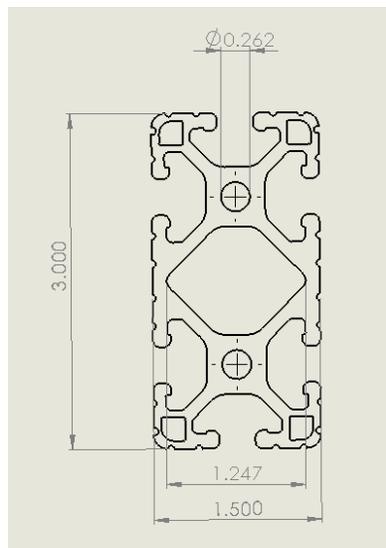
Cross Section of Beam 1530 T-Slotted Profile [2]
